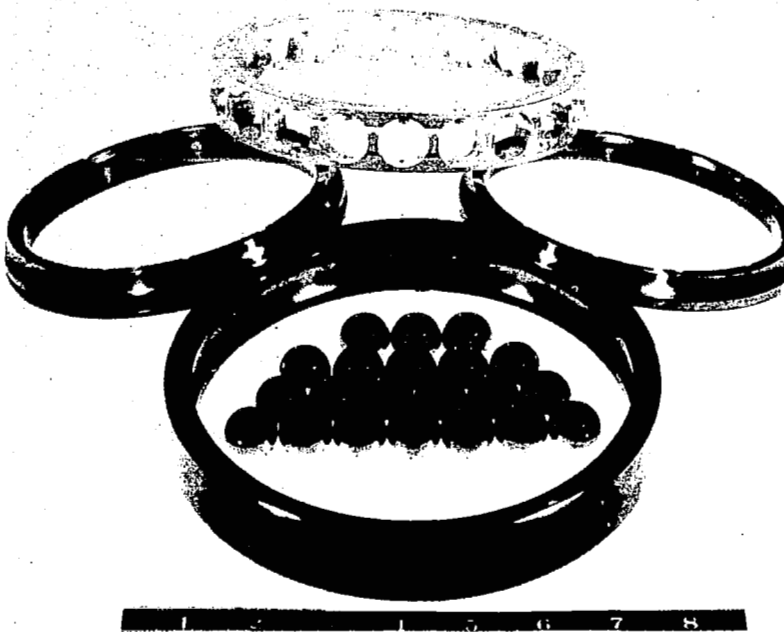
Overall View of Drilled - Ball Bearing S/N 2552A-1 After 23.52 Hours
